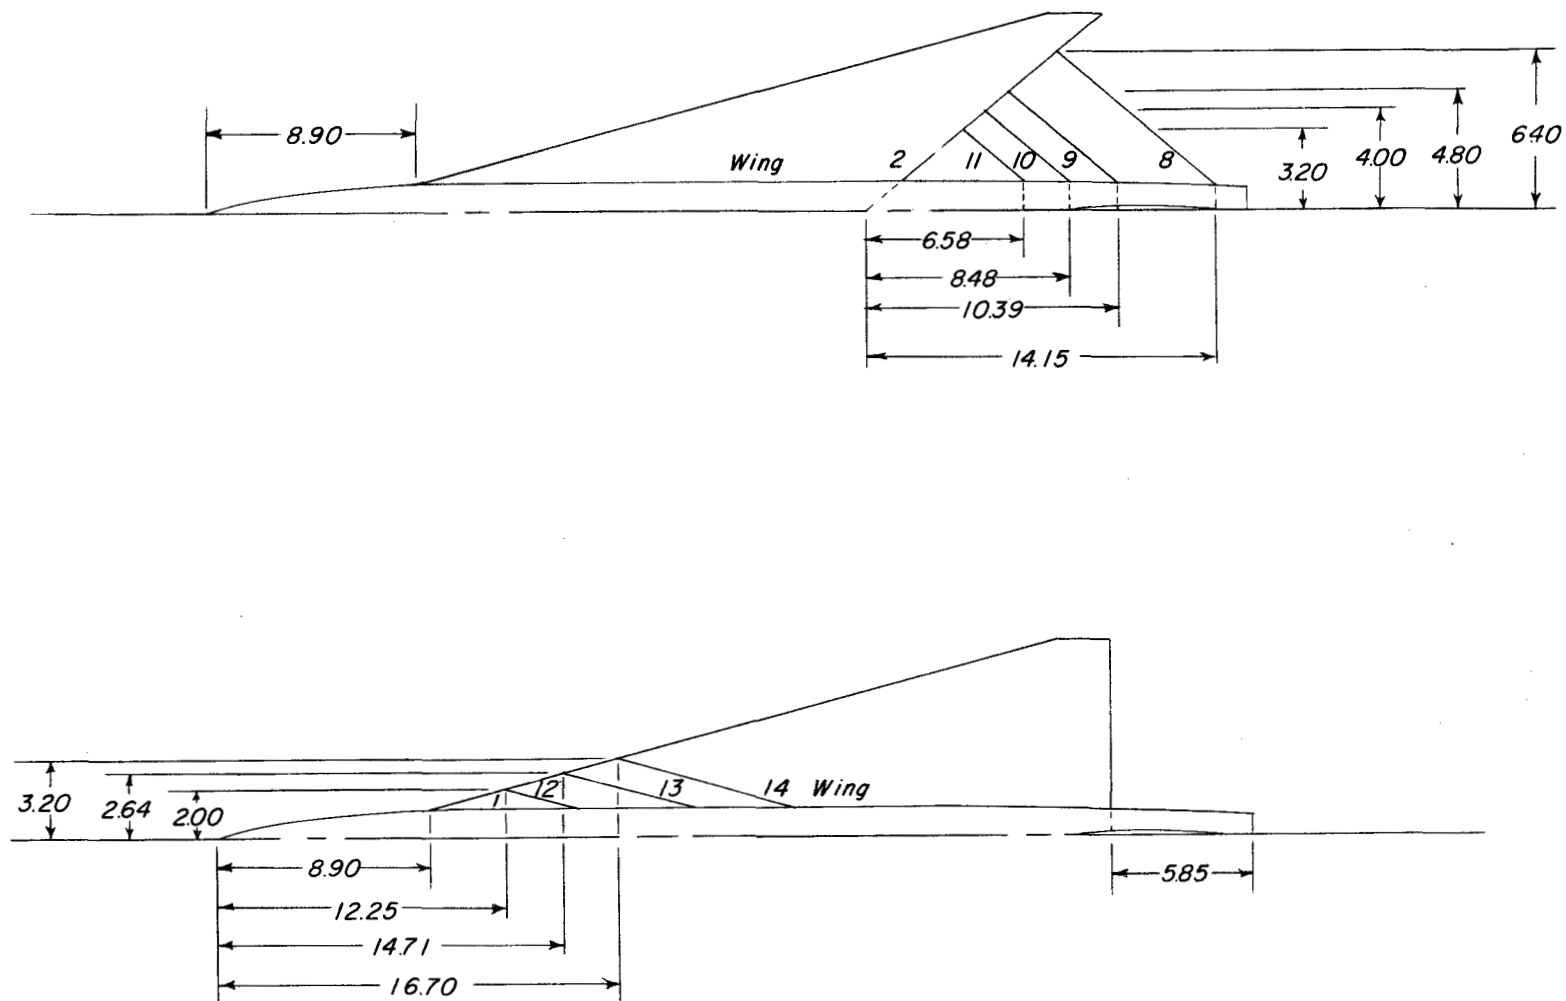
Geometric dimensions of wings 8 to 14. All dimensions are in inches.
